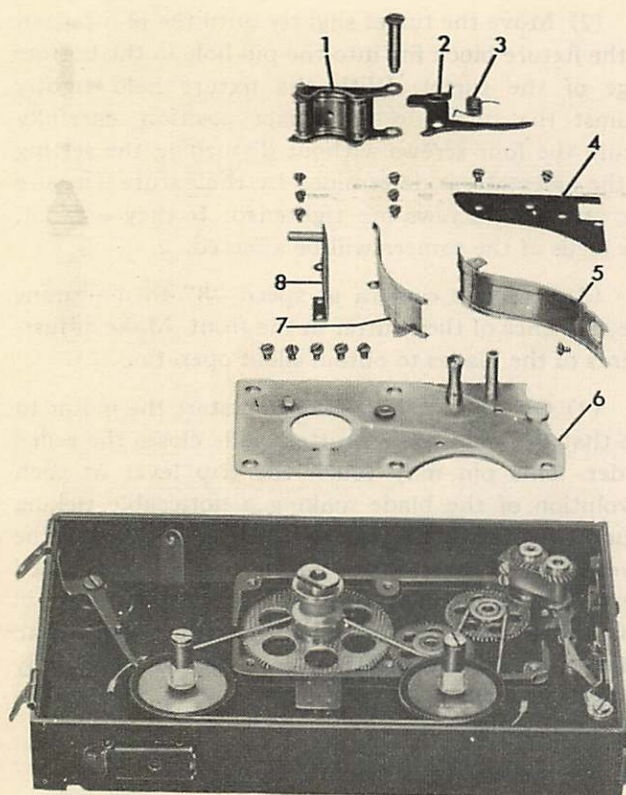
100-Foot Film Chamber—Guides and Plates Exploded
